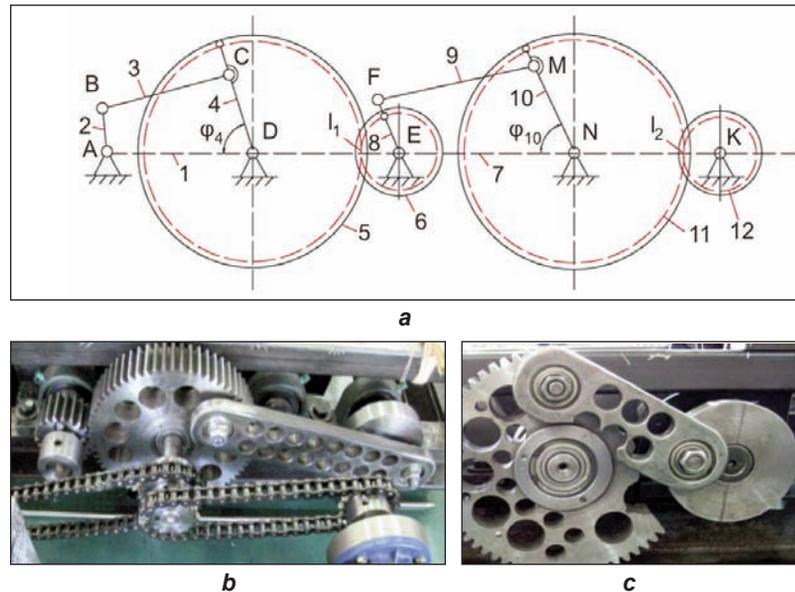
Drive mechanism: a – kinematic scheme of newly developed drive mechanism; b – drive mechanism (right side); c – drive mechanism (left side) [11]
